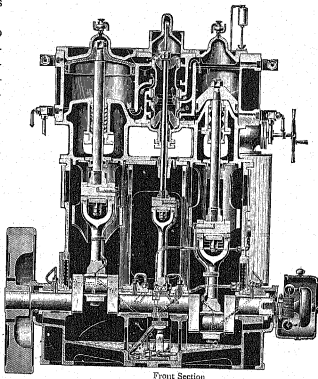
The Belliss & Morcom Double-acting Engine (front section)
